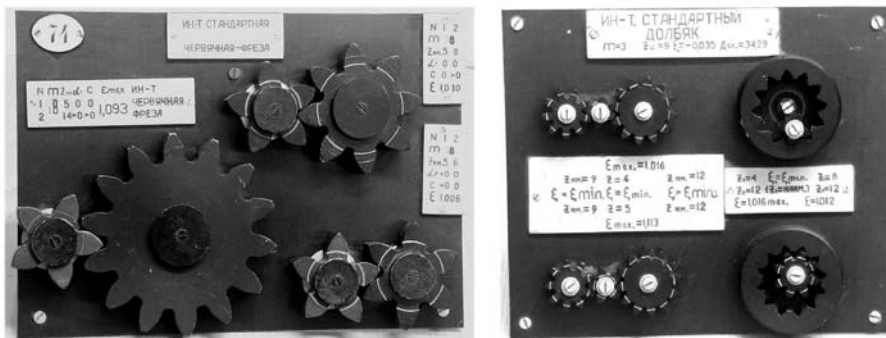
Models of involute gearings with a minimal number of teeth
